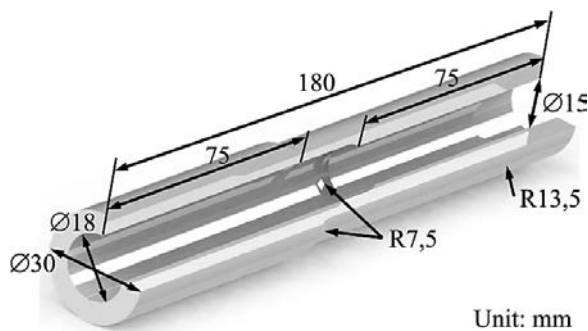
3/4 Extruded Hollow Shaft Workpiece Model
